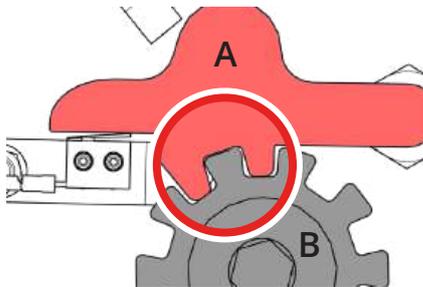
A - Brake hammer (A) engaging correctly with the cut-outs of the brake disc (B).
